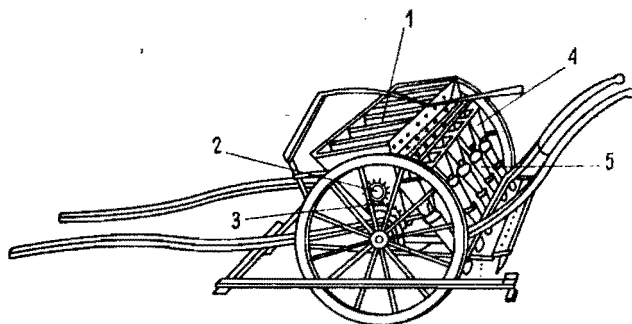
James Cook's seeding machine: 1—seed box; 2—shaft; 3—gear transmission; 4—seed compartments; 5—furrow openers.
